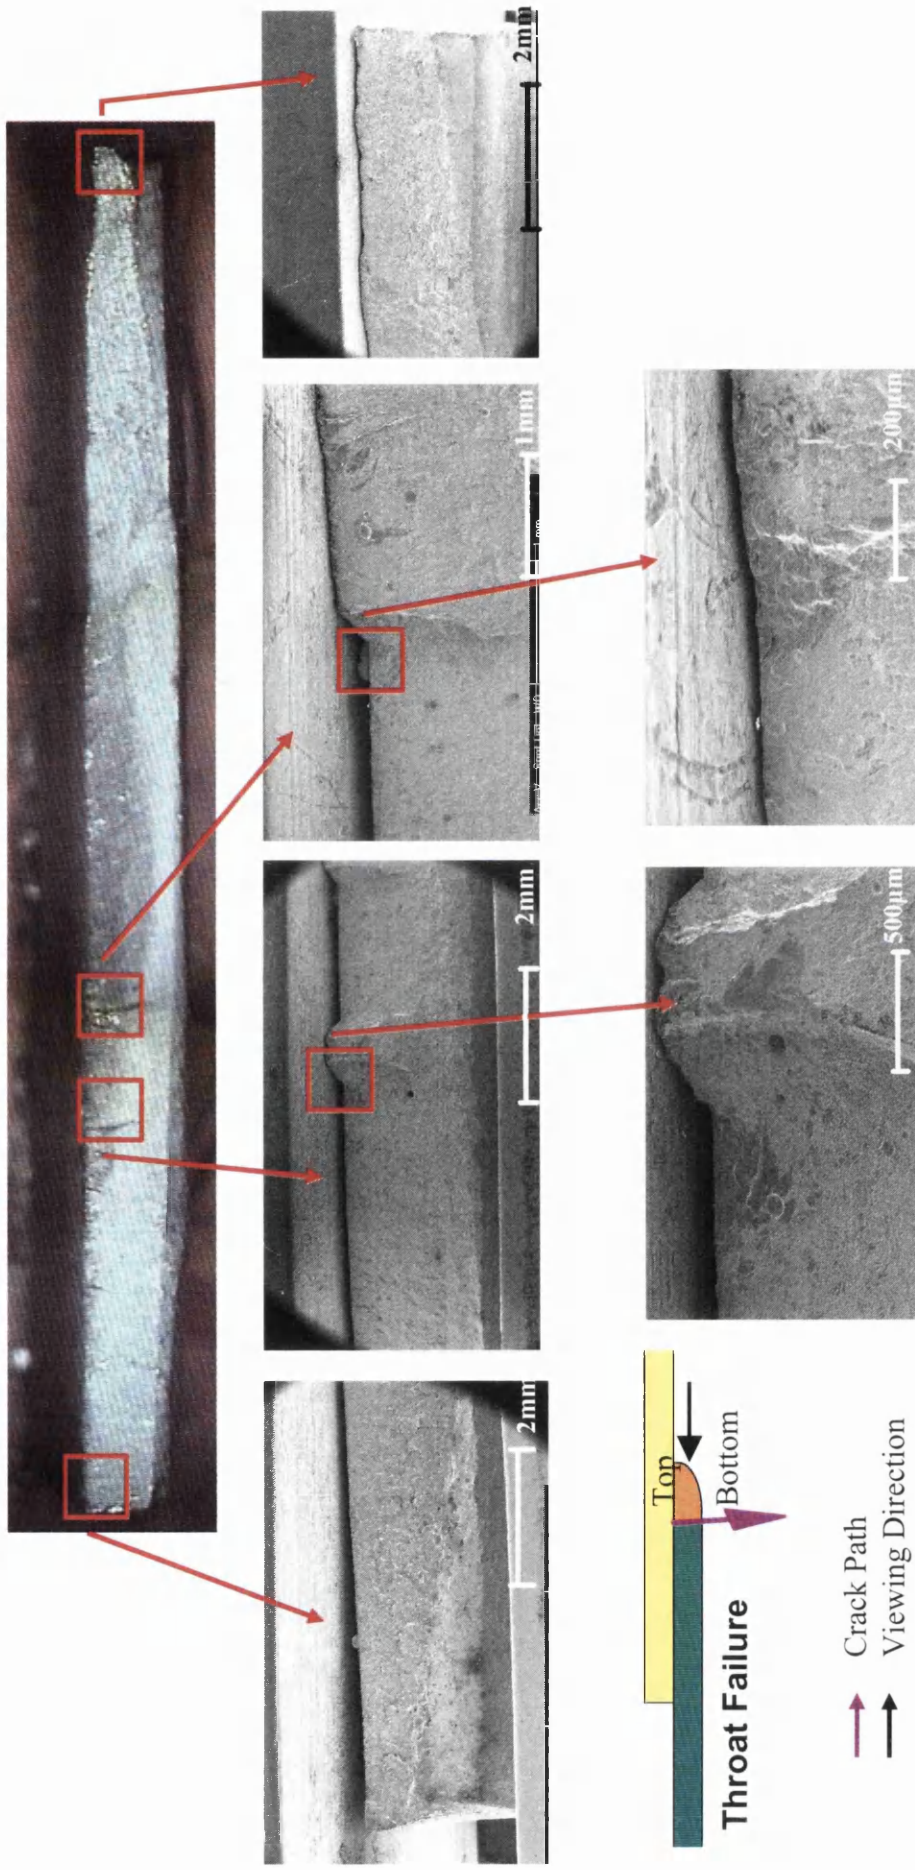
Typical Fracture Surface for GM2 Weld Throat Failure – Sheet View
